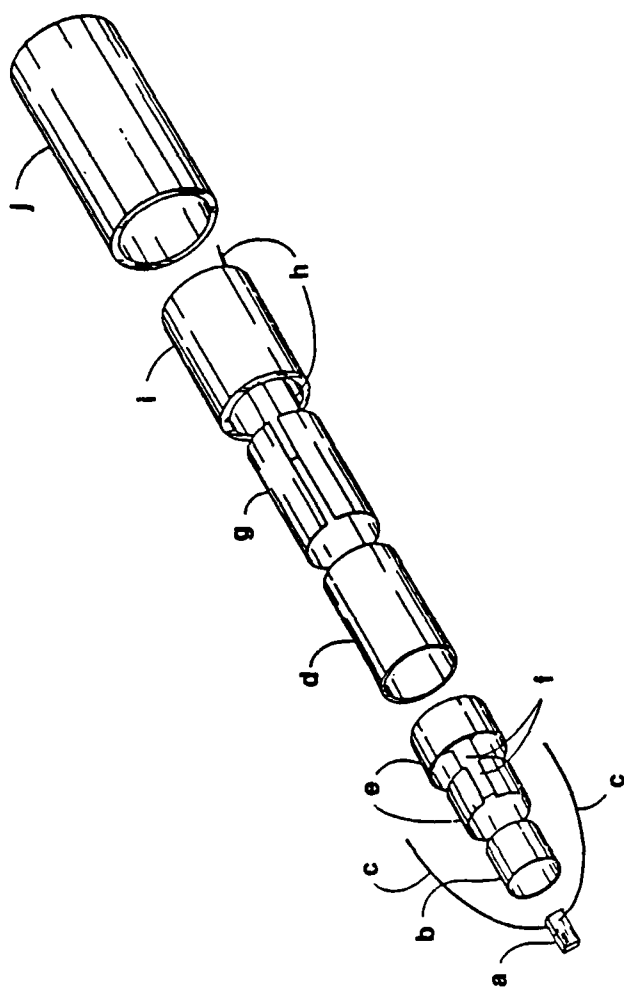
SHEAR WAVE TRANSDUCER (EXPLODED)
